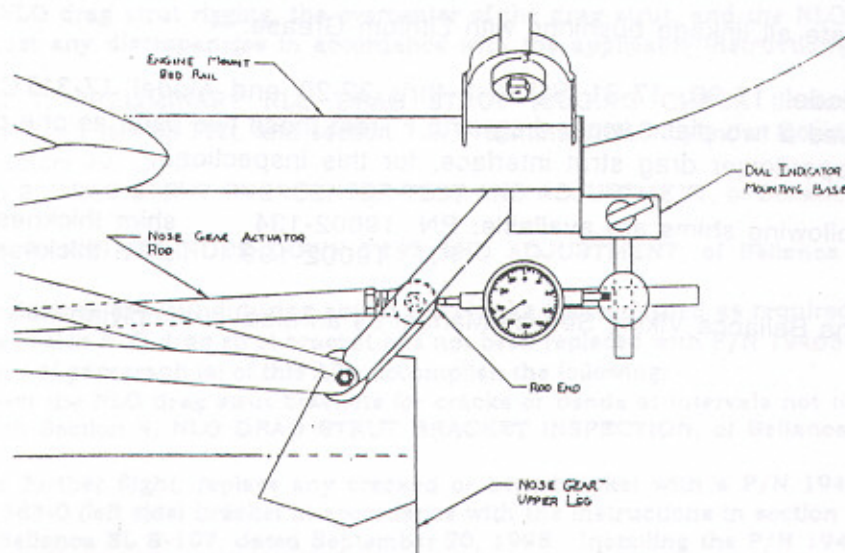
Dial Indicator Set-up (Model 17-30A Shown)
